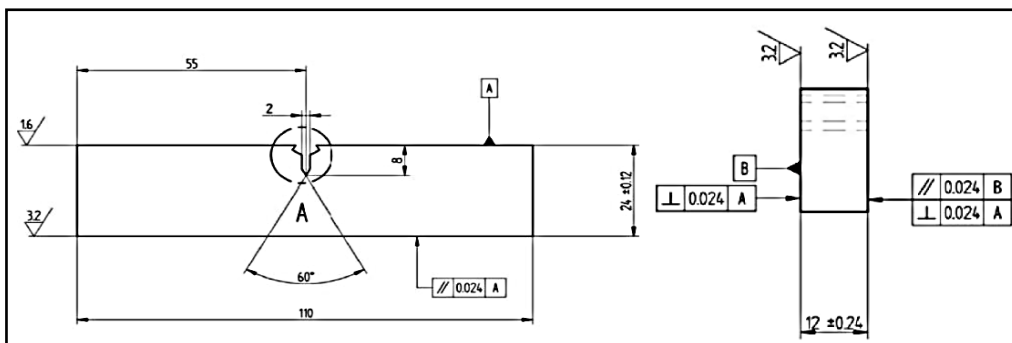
SEB specimen dimensions with EDM notch on center of the specimen
